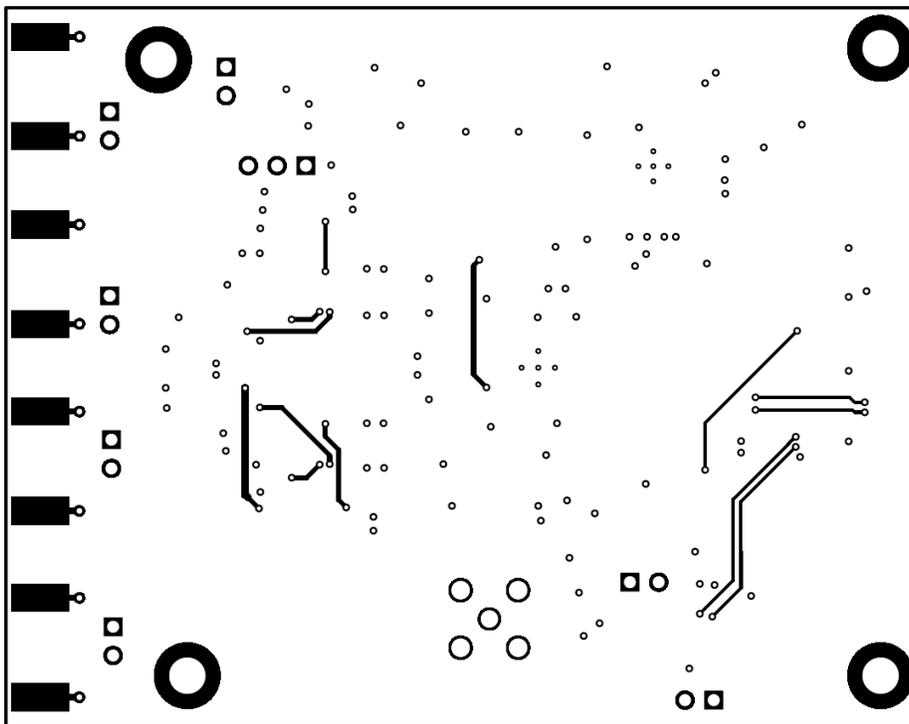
ADS9224REVM PCB Layer 4: Bottom Layer
